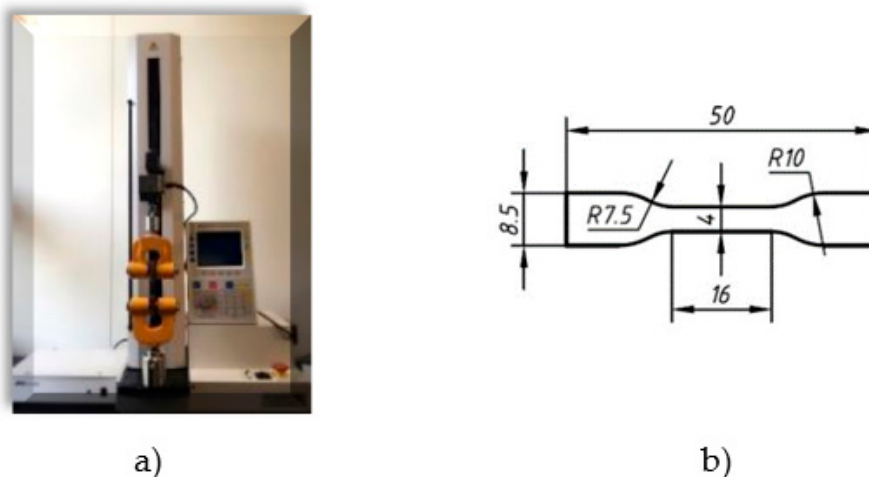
Desktop material tester (Orientech STA-1150) shown in a) and the dumbbell-shaped test piece shown in b).
